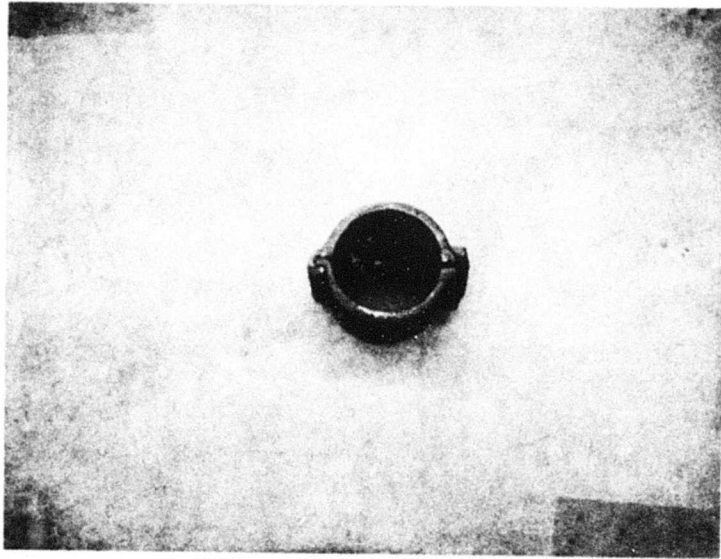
Skinner emergency pipe clamp--closed (but without bolts).
